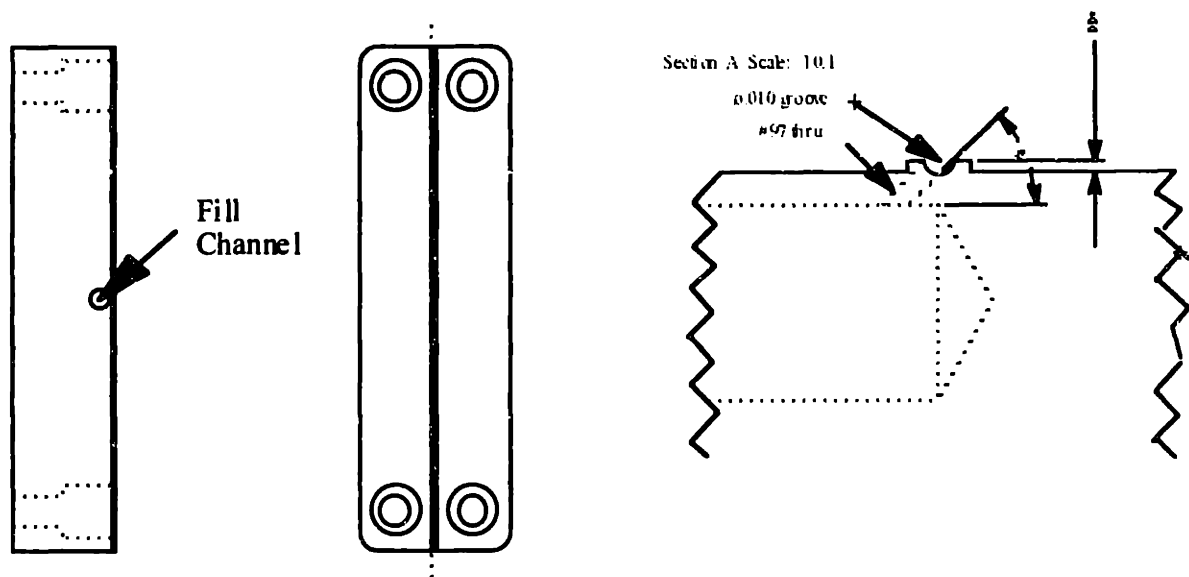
Aluminum Half Mold With Blowup Of Fiber Groove and Shelf
